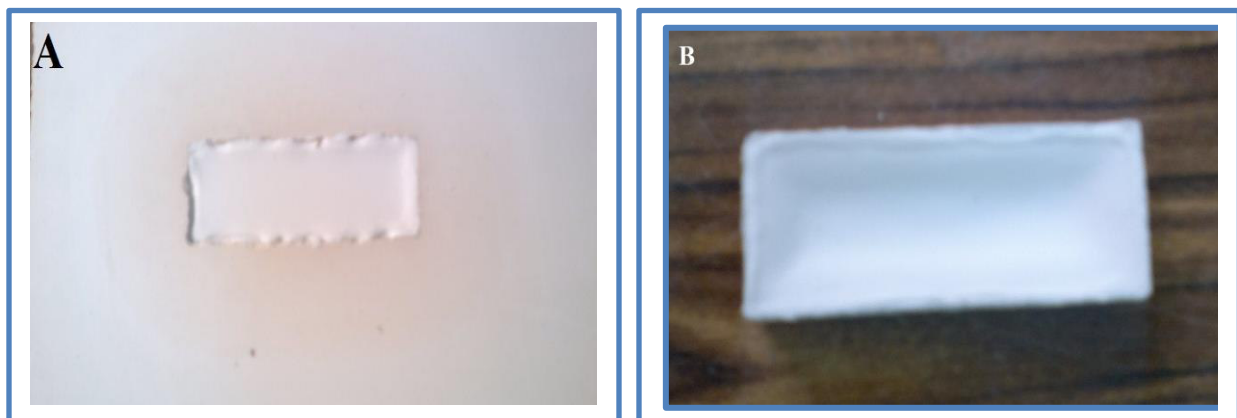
The cast A) in the mould. B) After de-moulding.
